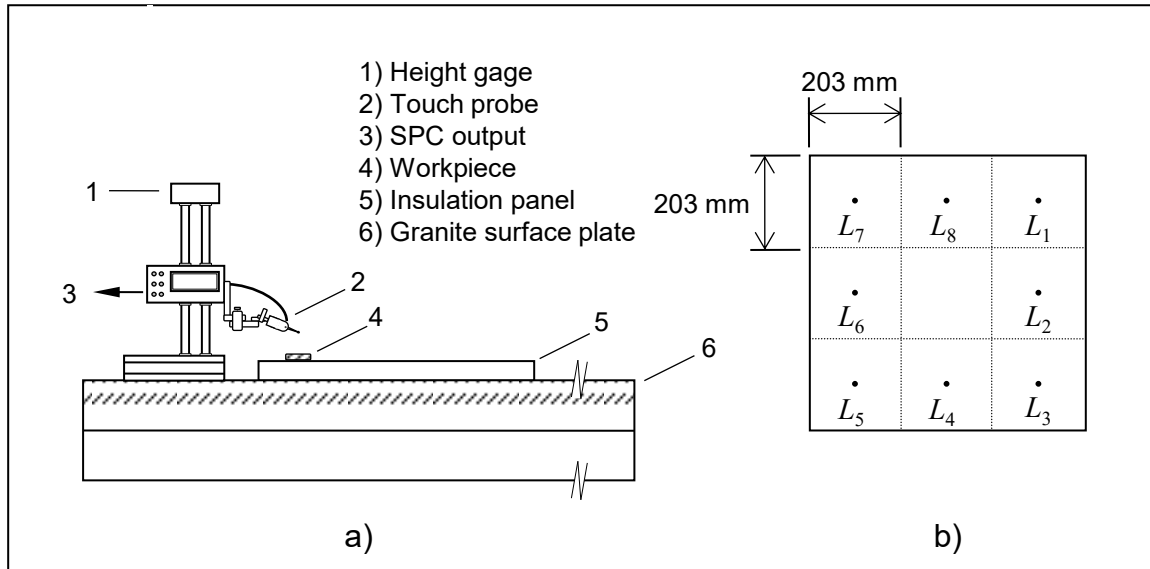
(a) Front view shows 305 mm height gage and insulation board with workpiece on granite surface plate. (b) Top view shows the 8 measurement locations (L_1 through L_8) each in the geometric center of a 203 mm by 203 mm subdivision of the insulation board (metallic rings are not shown).
